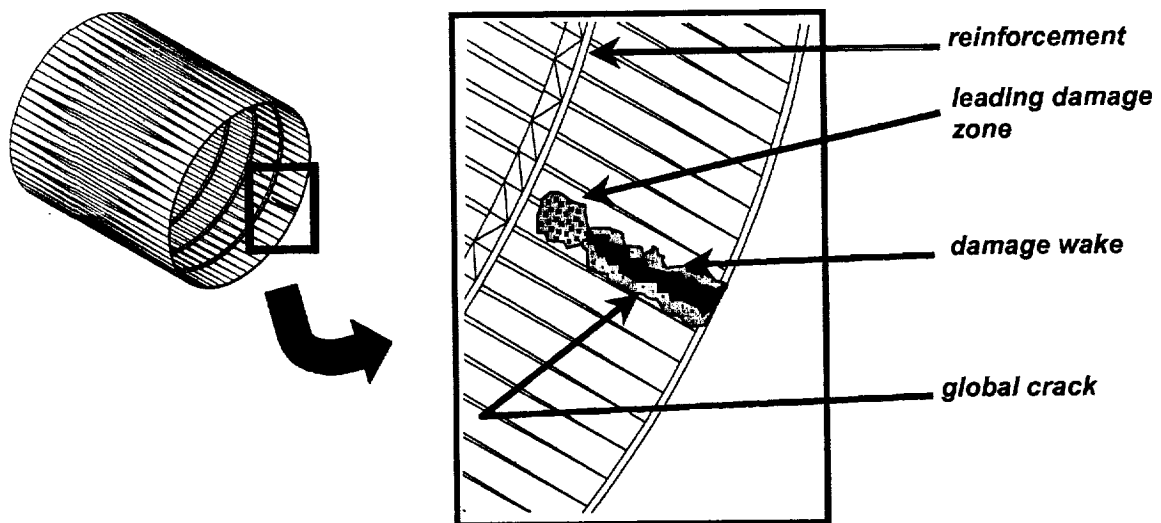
A "Global Crack" traversing a built-up structure with damage wake and interaction zone near a reinforcement element.
